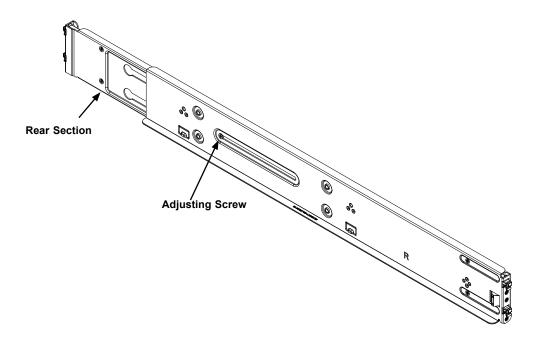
Rackmount Rail (Right rail assembly shown)
